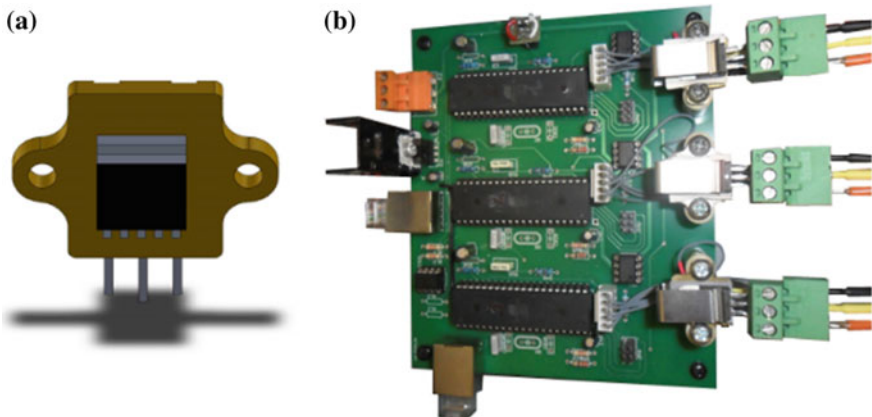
a Detailed 3D view of the mini-heater; b A prototype board with 3 TCMs
